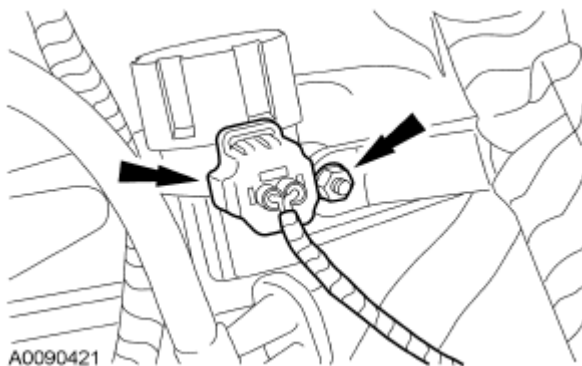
Locating Exhaust Gas Recirculation (EGR) Vacuum Regulator Electrical Connector
